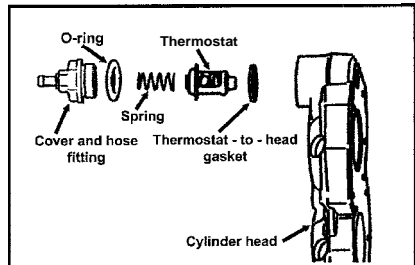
Exploded view of the thermostat assembly-135-175 hp (2589cc) 60LV6 FFI motors without hard fuel rails
